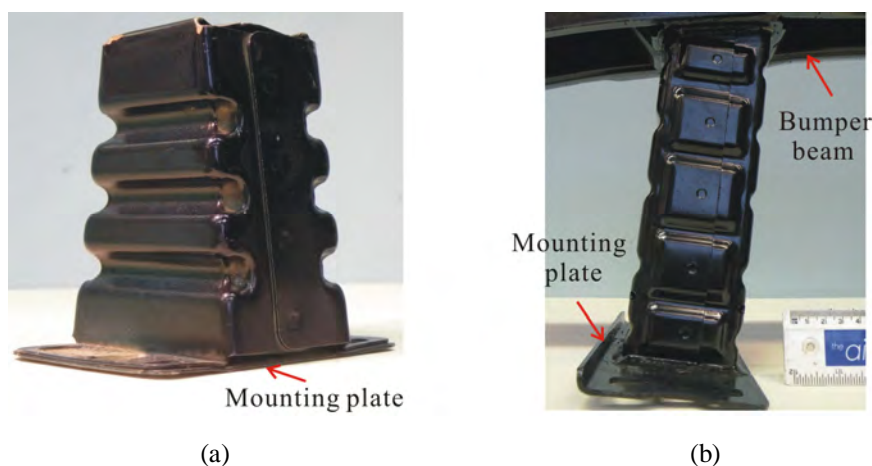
(a) Range Rover crashcan, and (b) BMW crashcan.
